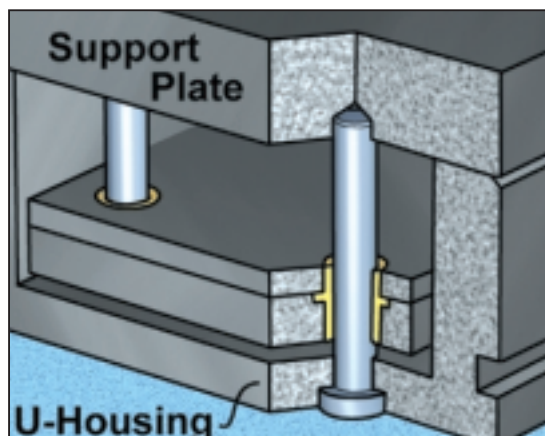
Illustration D: Four aluminum bronze bushings with mid-bushing flange used to guide ejector system.
